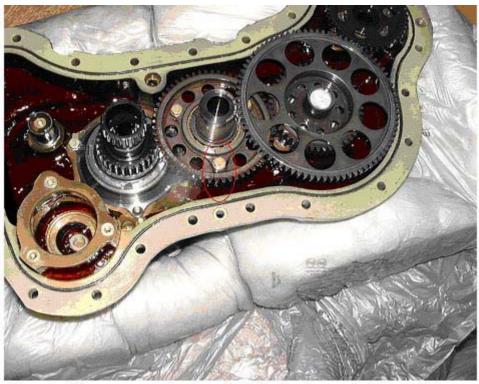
LH accessory gearbox module from G-JSAR, showing cracked intermediate gear
